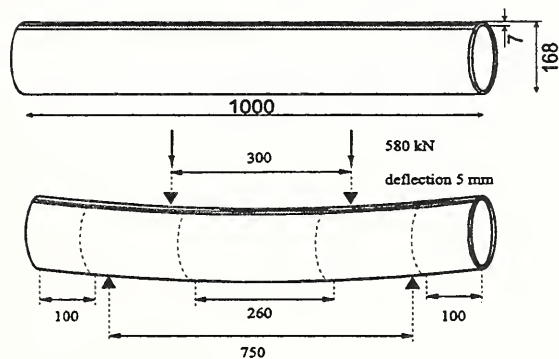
Schematic of the bent tube before and after bending. The weld is parallel to the cylinder axis. The central 260 mm and the outer 100 mm portions were cut out and used for the neutron measurements.
